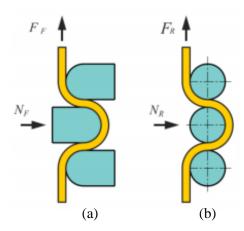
Drawbead Test Method with Fixed (a) and Rotating (b) Rollers [10].
